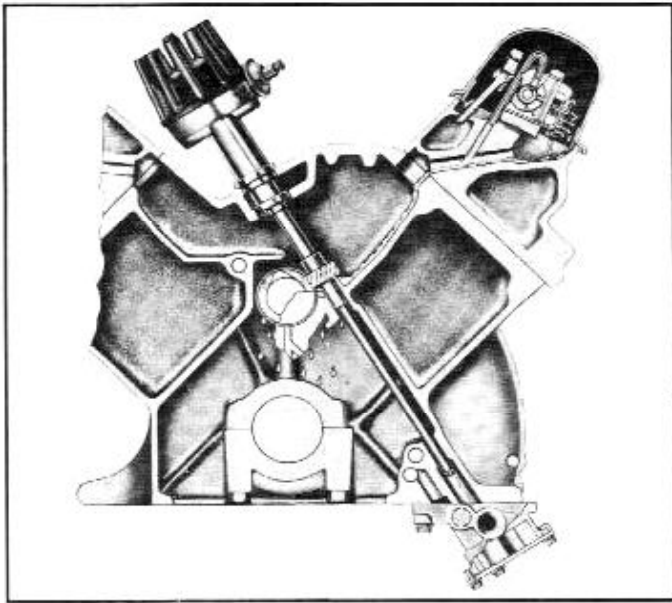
C-8—Lubrication of Rocker Arm Assembly and Distributor Shaft Bushing
